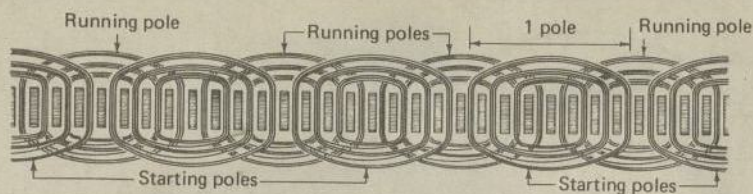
A diagram of the stator in Fig. 1-13 with slots and windings shown as they would look if rolled flat. The starting-winding poles are located between two running-winding poles.
